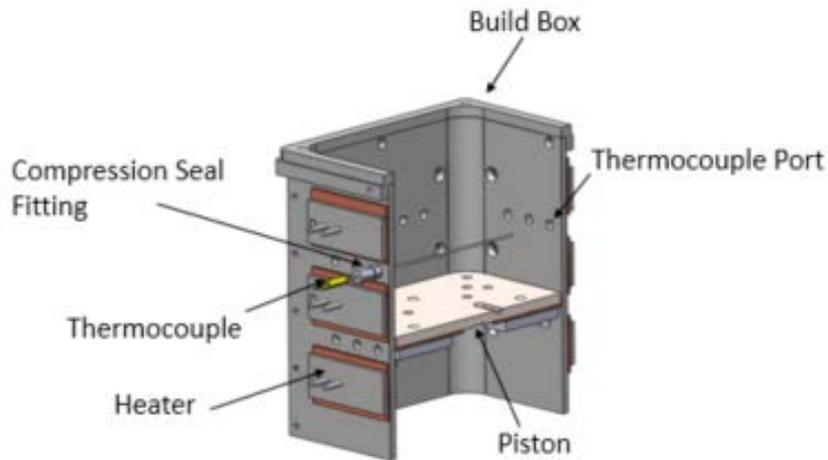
Build Box and Piston Allowing Thermocouple Access to the Part Cake
